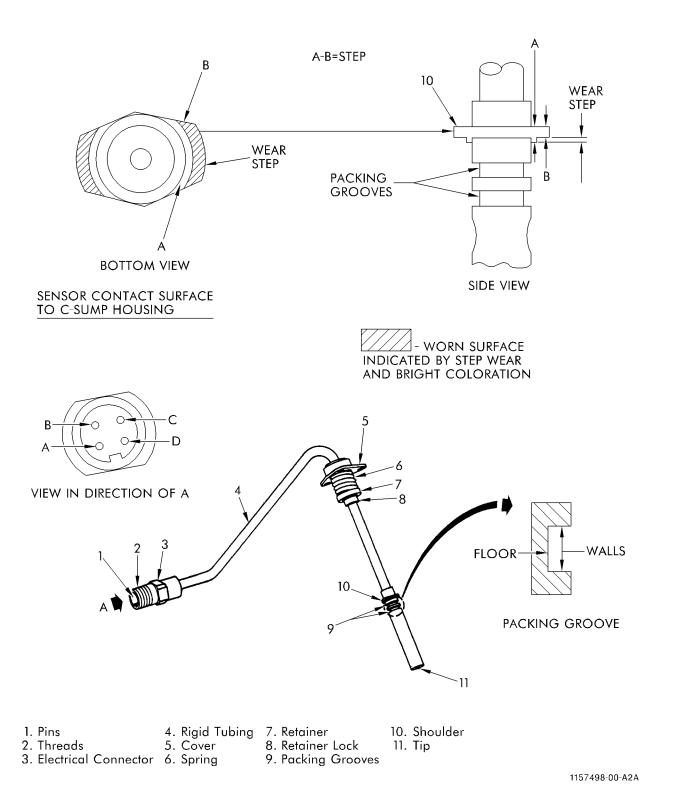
Torque and Overspeed Sensor and Np Sensor; Inspection
